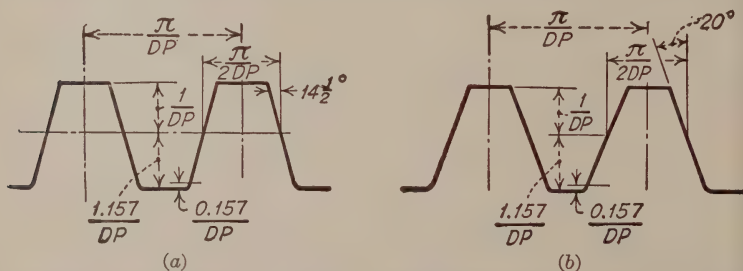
(a) Basic rack of $14\frac{1}{2}$ -deg. generated gear-tooth system; (b) basic rack of 20-deg., full-depth, gear-tooth system.
